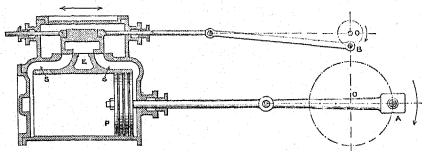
Cylinder and Slide-valve Arrangement. The valve is shown without laps or lead
